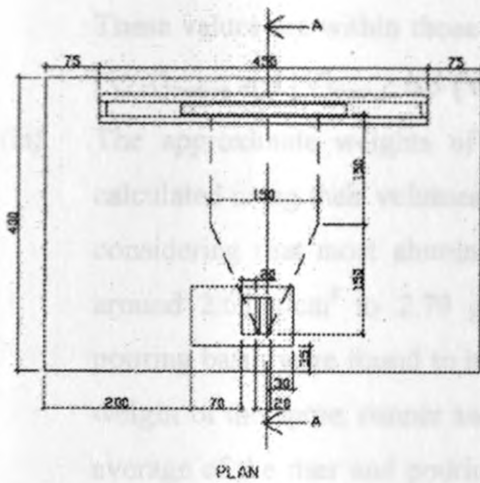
Quiescent bottom filled mould design assembly used in the current study for permanent mould casting. Note that all the dimensions and the mould assembly are similar to that for green sand casting shown in Fig 3.4 except for the 10 mm mild steel chill plates placed around the casting bar to simulate permanent moulding. All dimensions are in mm
